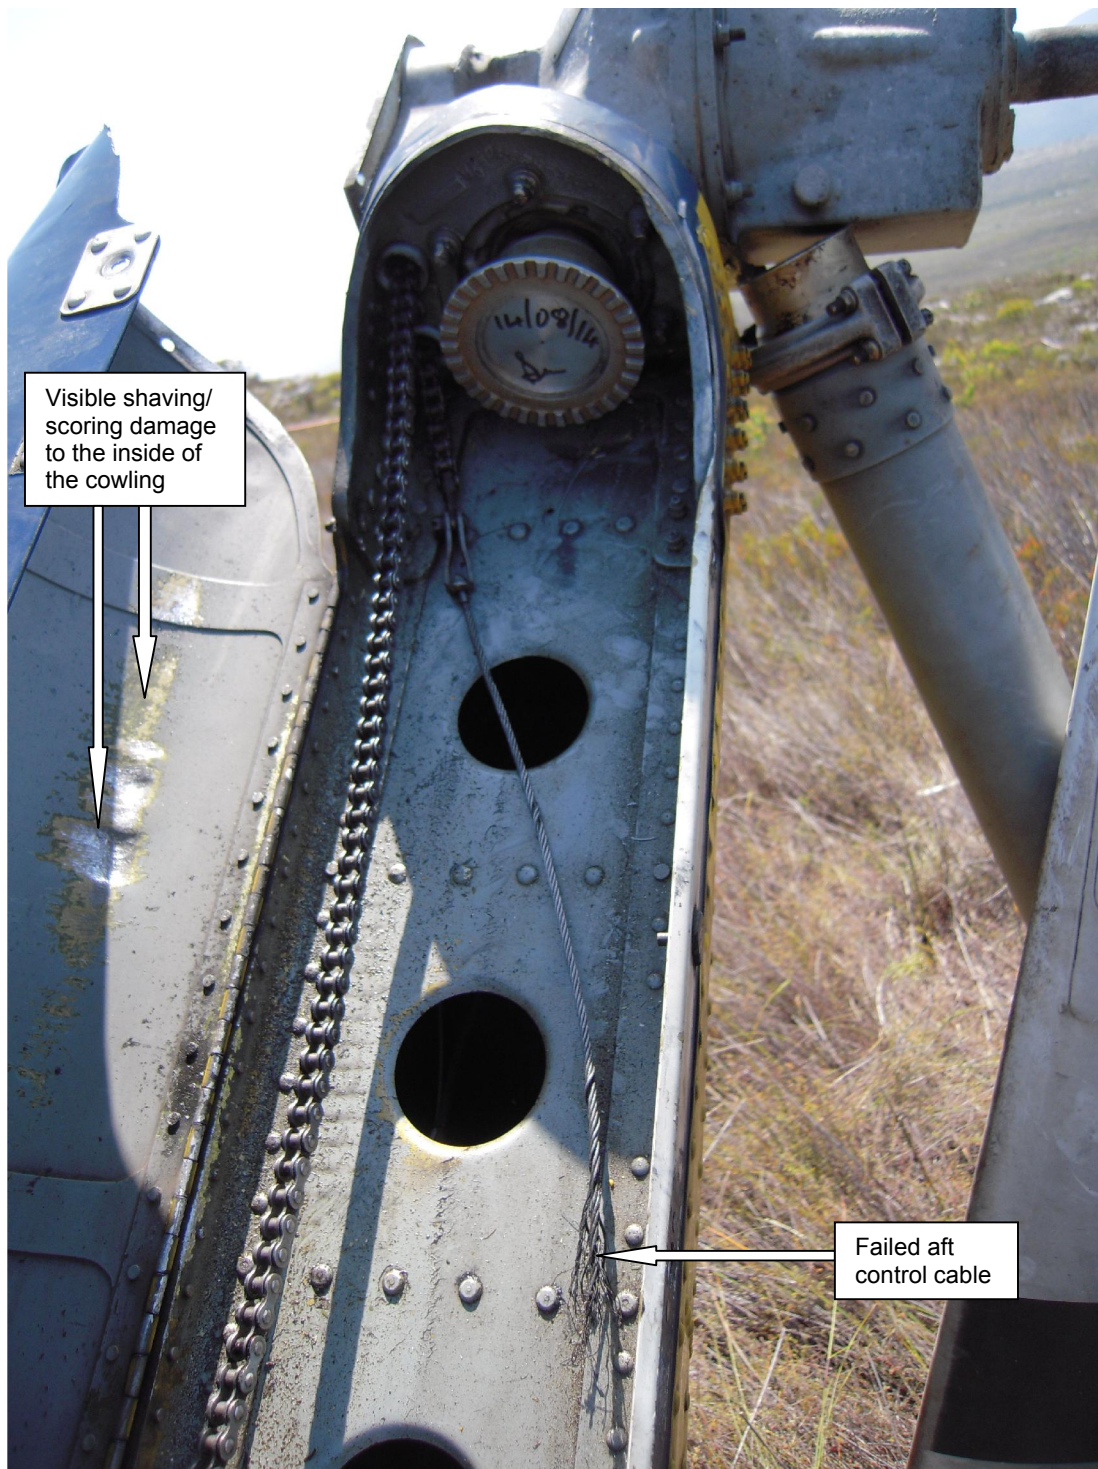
Photograph of both ends of the aft tail rotor control cable that was found to have failed
